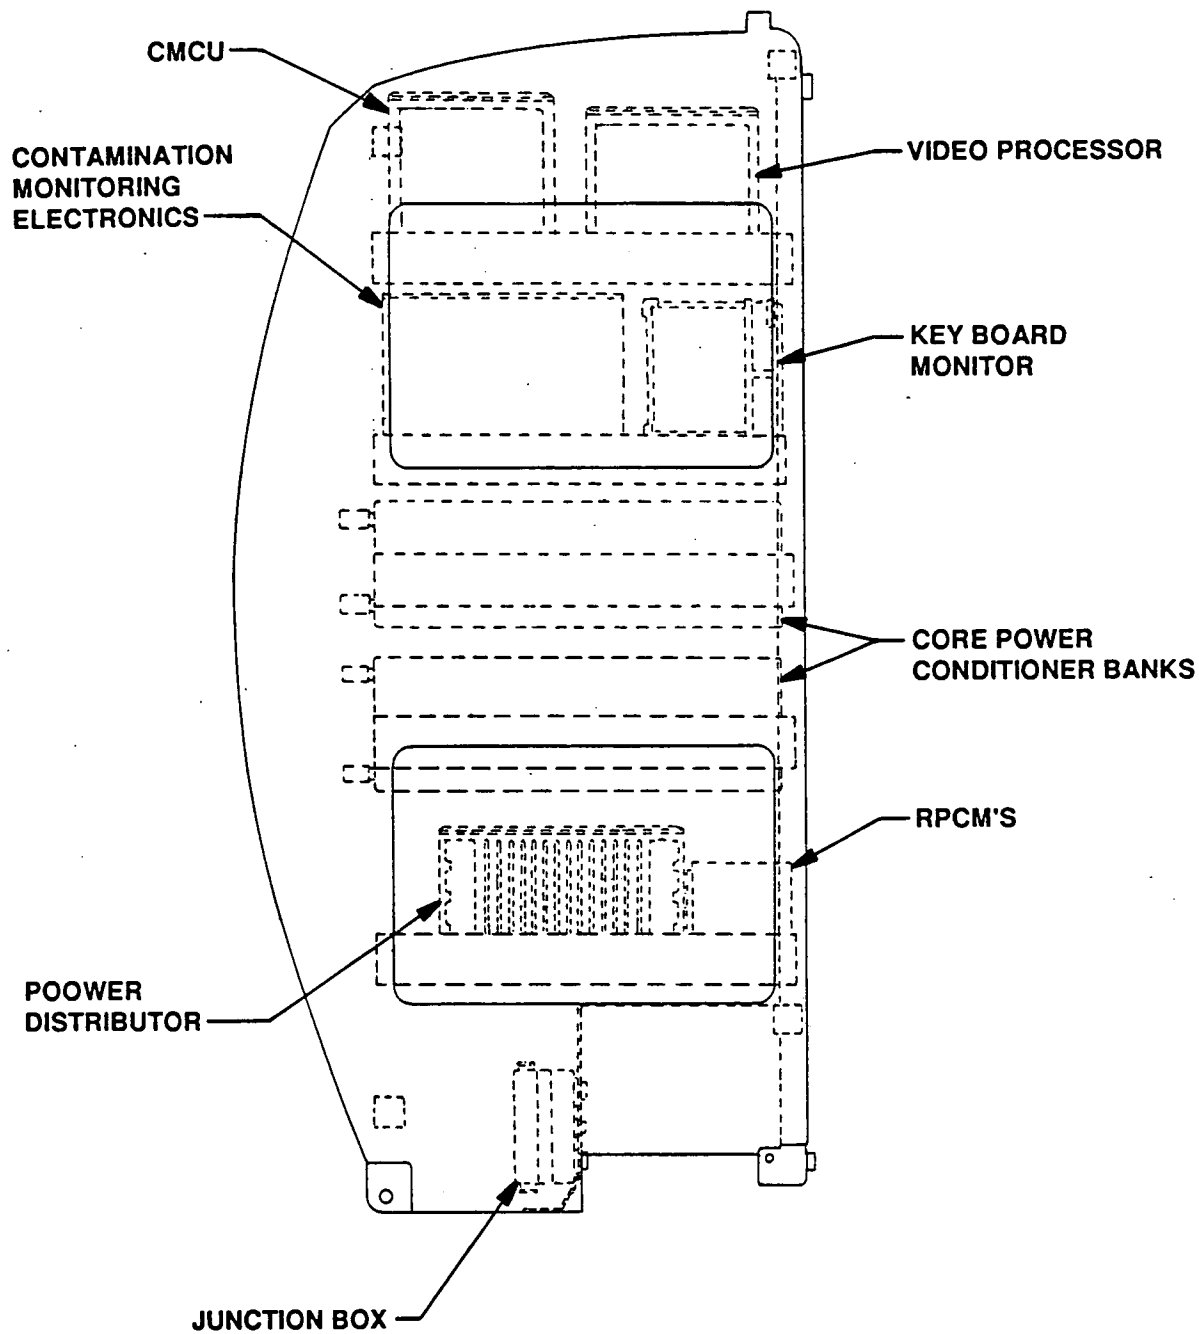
SSFF CORE RACK VIEW B - B (Sheet 2 of 2)
